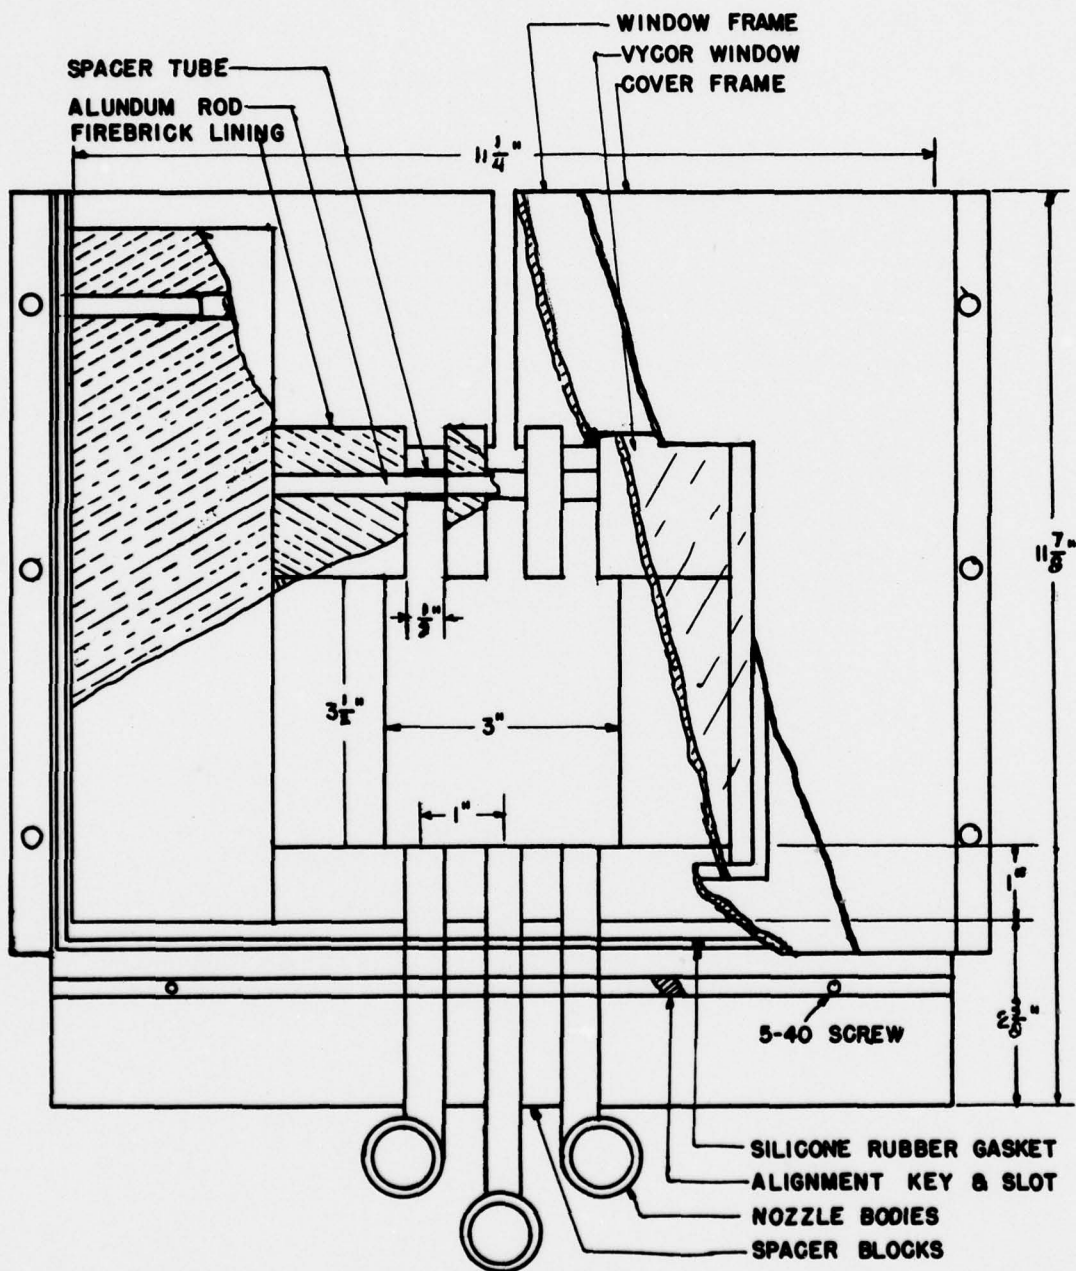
COMBUSTION CHAMBER ASSEMBLY
